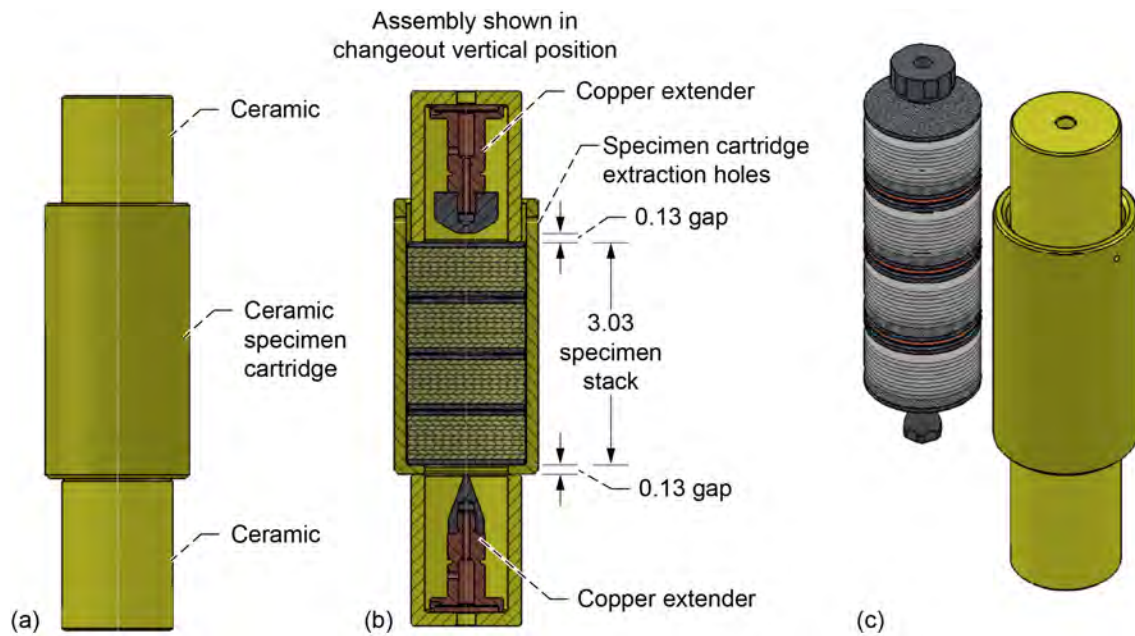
Disk stack and holder arrangement. Dimensions in inches. (a) Ceramic specimen holder. (b) Cross section of ceramic specimen holder. (c) Specimen stack and ceramic holder.
